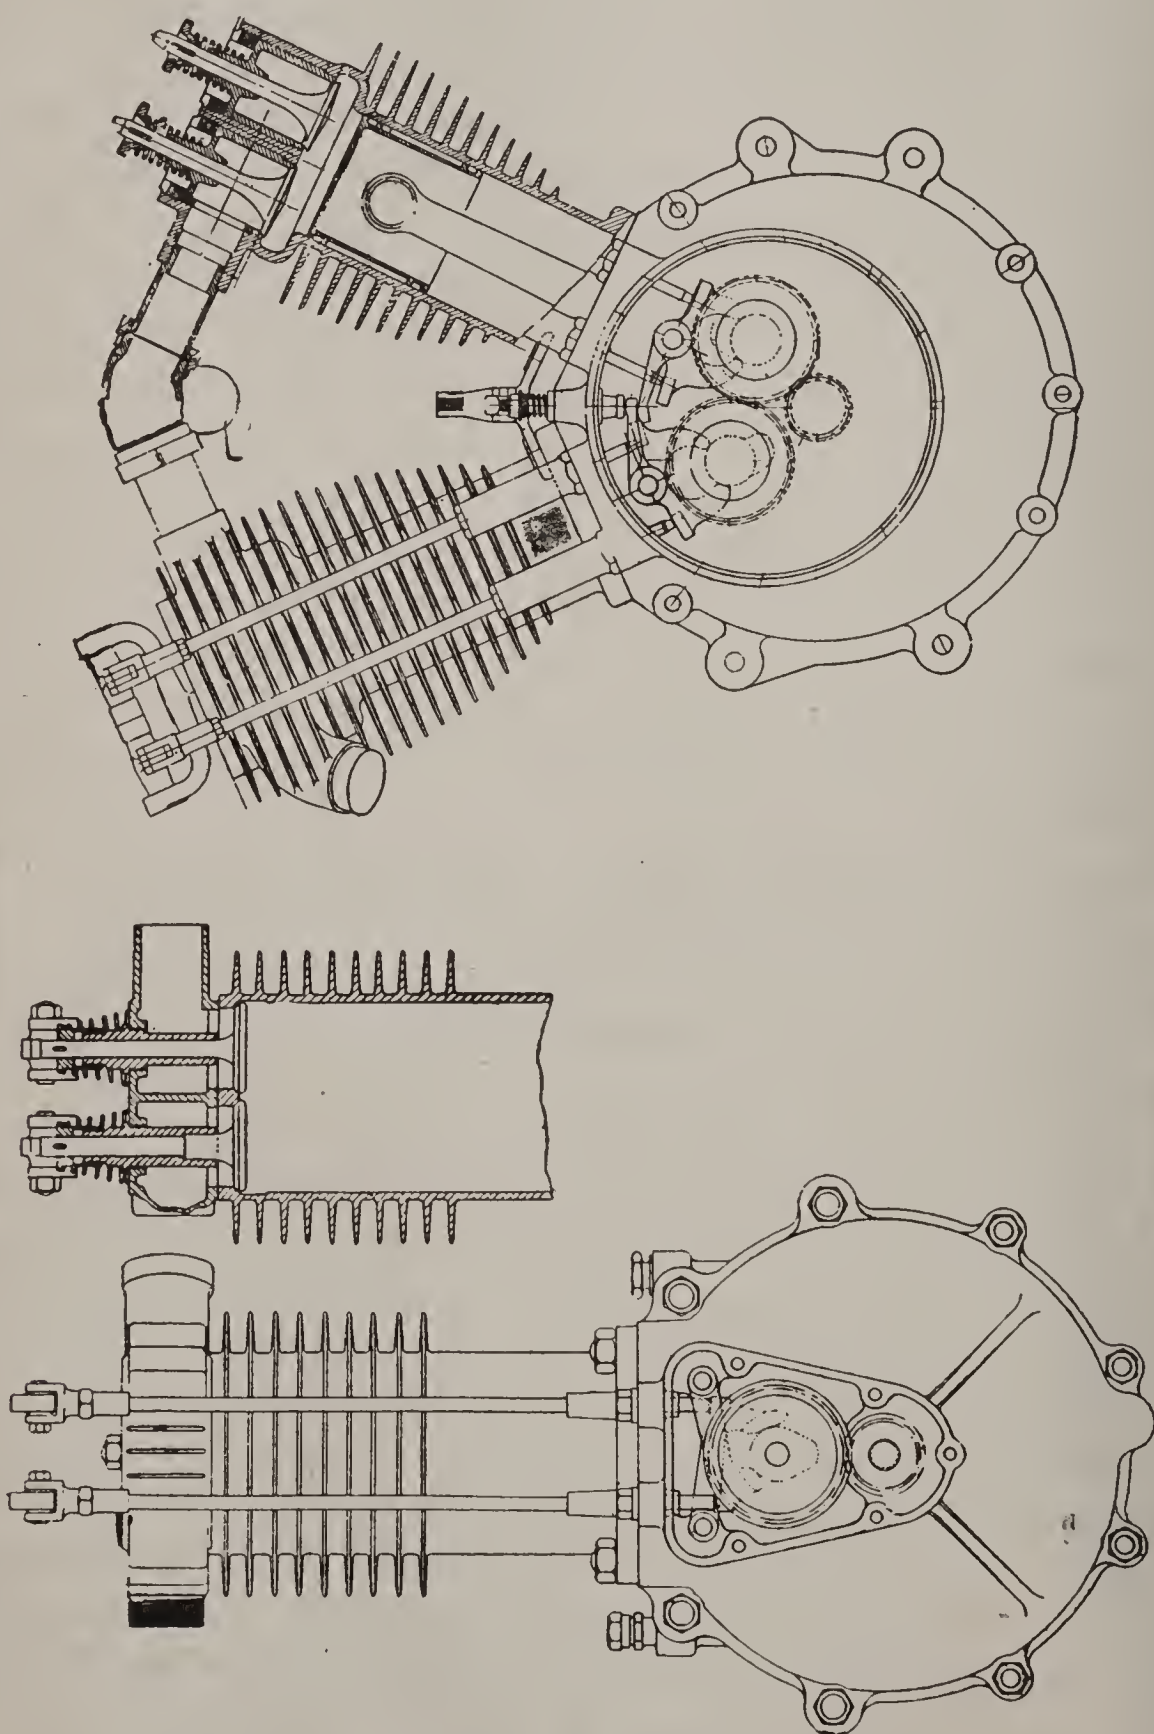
Typical Valve-in-the-Head Motors, Showing Methods of Installing the Valves so They Will Open Directly Into the Combustion Chamber.
